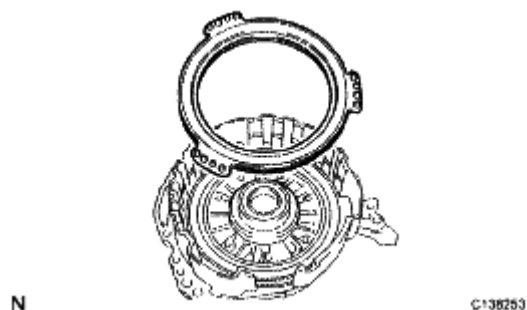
Identifying No. 1 Brake Piston To Oil Pump Assembly
